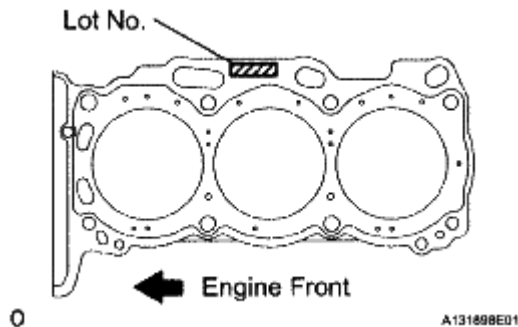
Placing Cylinder Head Gasket On Cylinder Block Surface With Lot No. Stamp Upward
